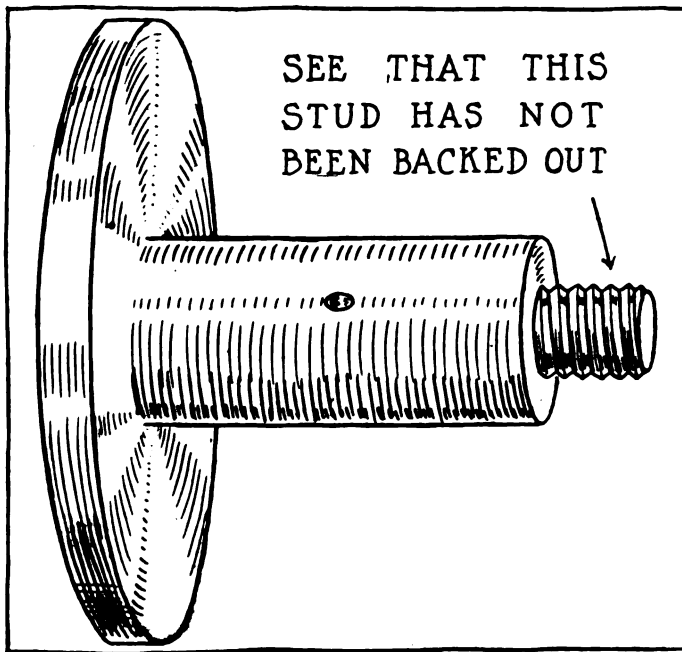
Stud in flywheel end of E-M-F crankshaft which should be kept tight
